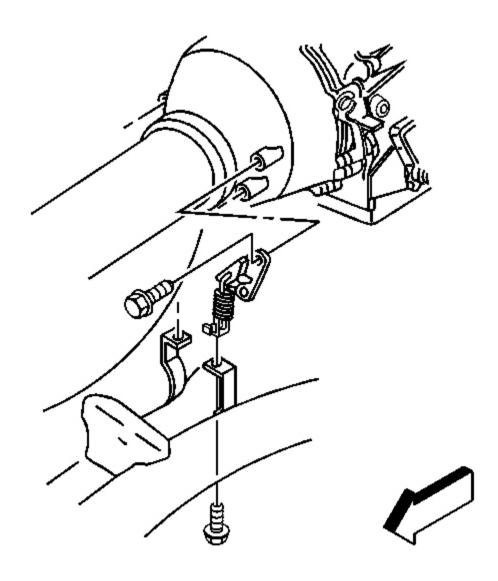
Exhaust Pipe Hanger Lower & Bolts Courtesy of GENERAL MOTORS CORP.
